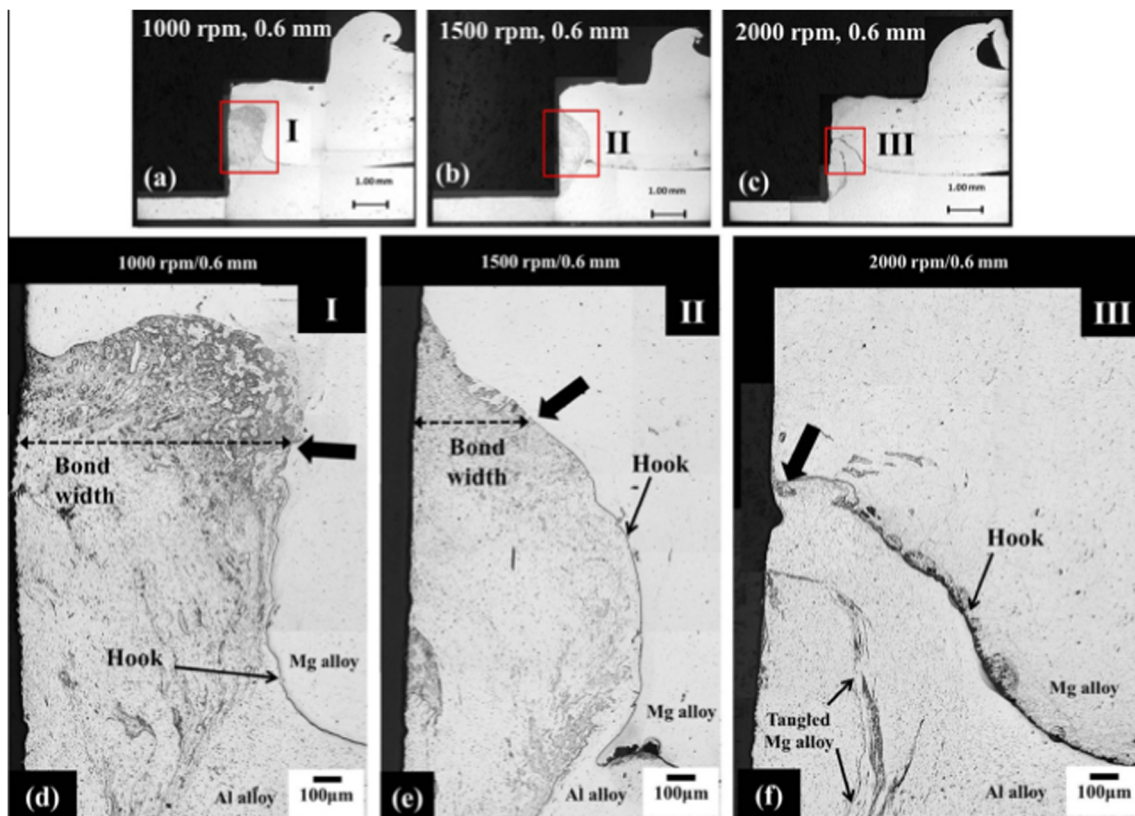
Illustration of the bond width at different welding speeds [22]
